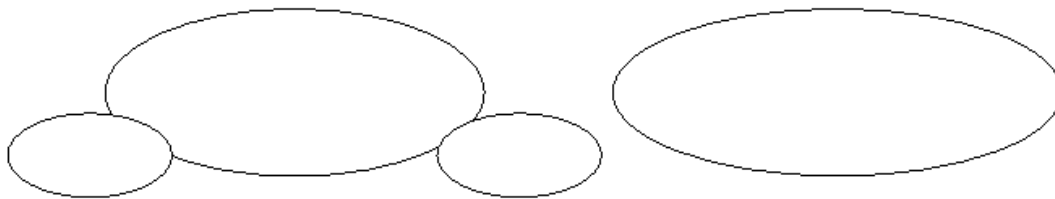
Cross-Sectional view - Arrangement of Laser beam Spots (Small Ellipses) Relative to the Arc Weld Pool (Larger Ellipse) at Left, to Achieve Maximum Weld Toe Wetting and Spreading, at Right
